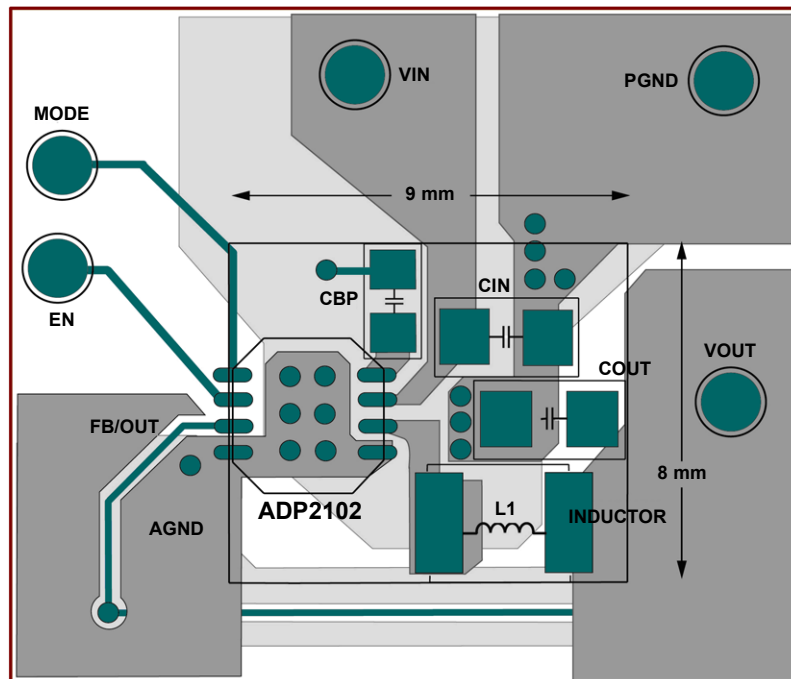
Recommended PCB Layout of the ADP2102-FXD
